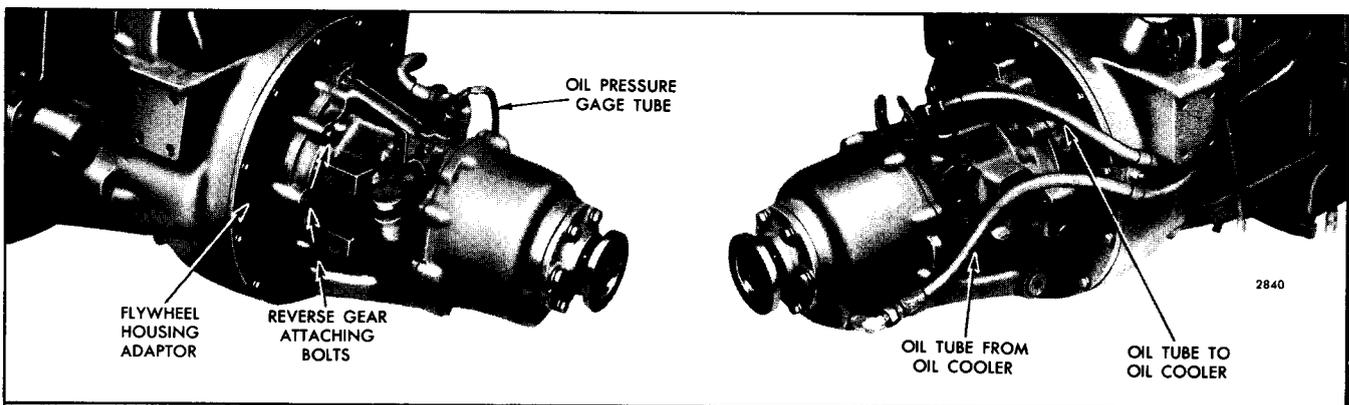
Reverse and Reduction Gear Mounting to Engine (Former)
